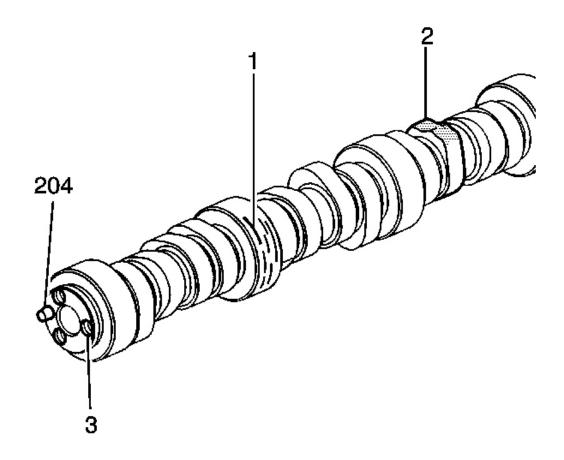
Identifying Camshaft & Bearing Inspection Areas Courtesy of GENERAL MOTORS CORP.
